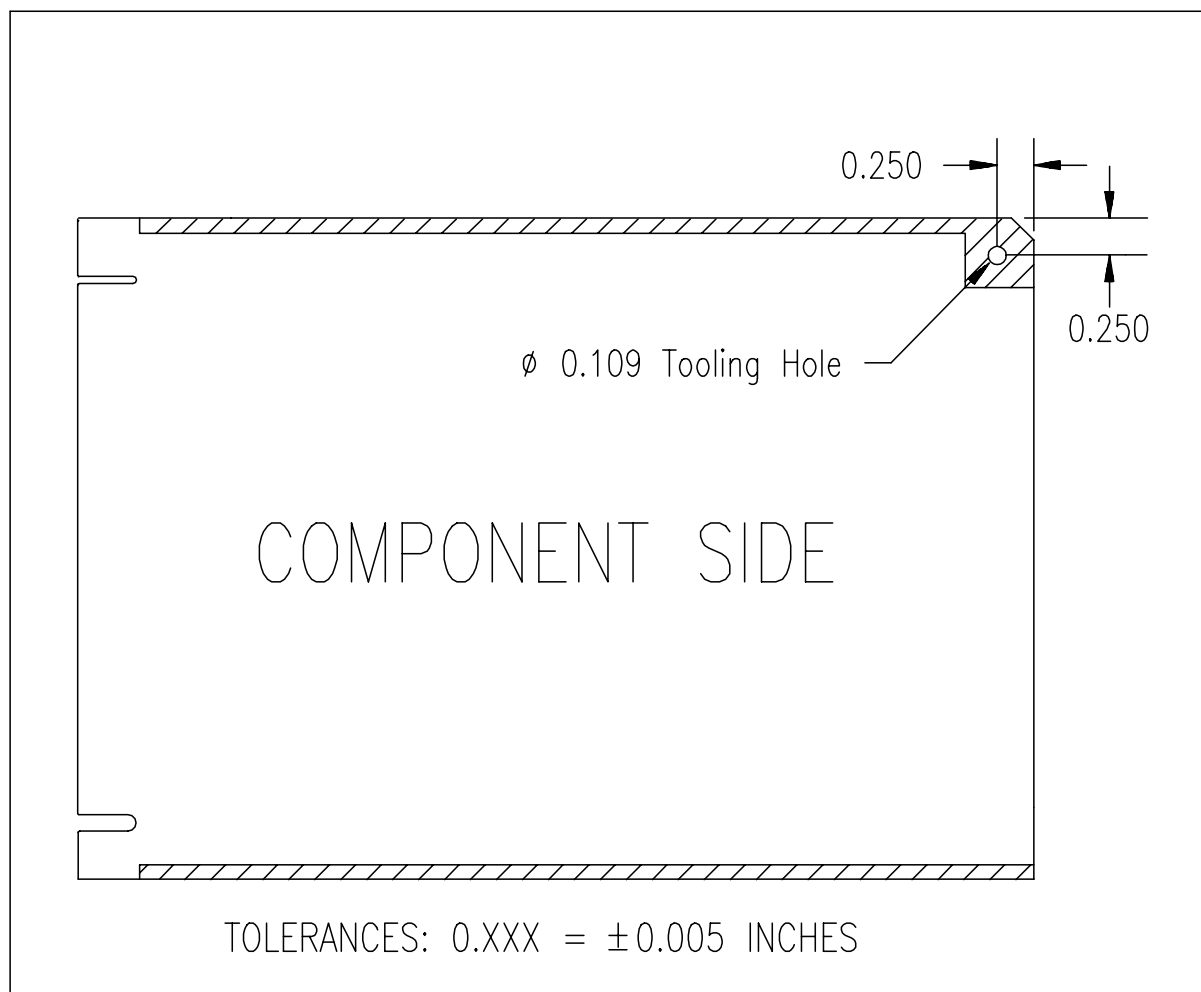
STD 32 PCB Tooling Hole Locations.
